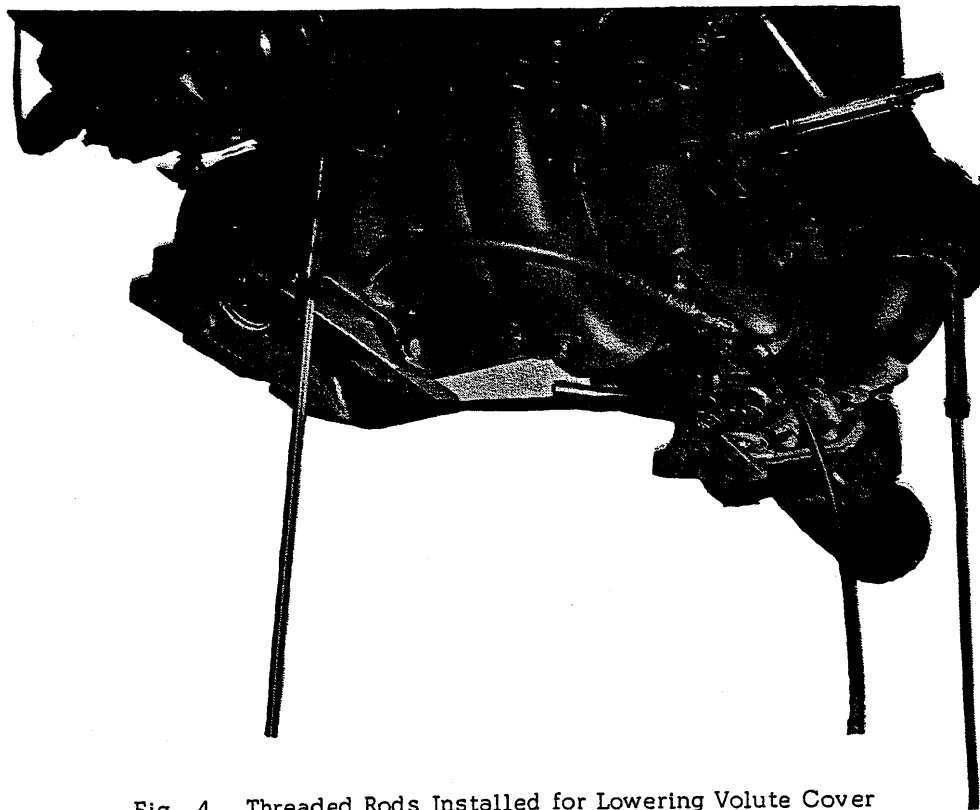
Threaded Rods Installed for Lowering Volute Cover
